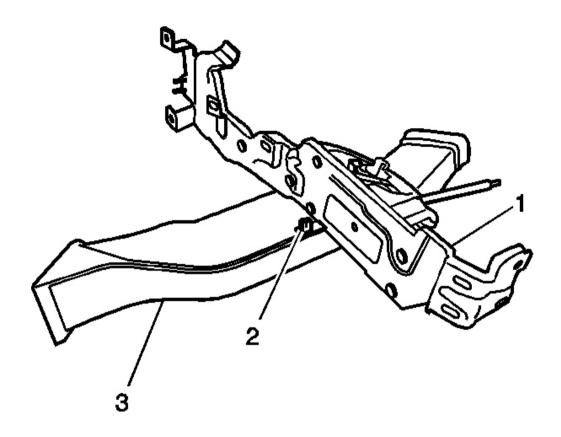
Air Outlet Duct & Console Support Bracket (Rear Floor) Courtesy of GENERAL MOTORS CORP.
